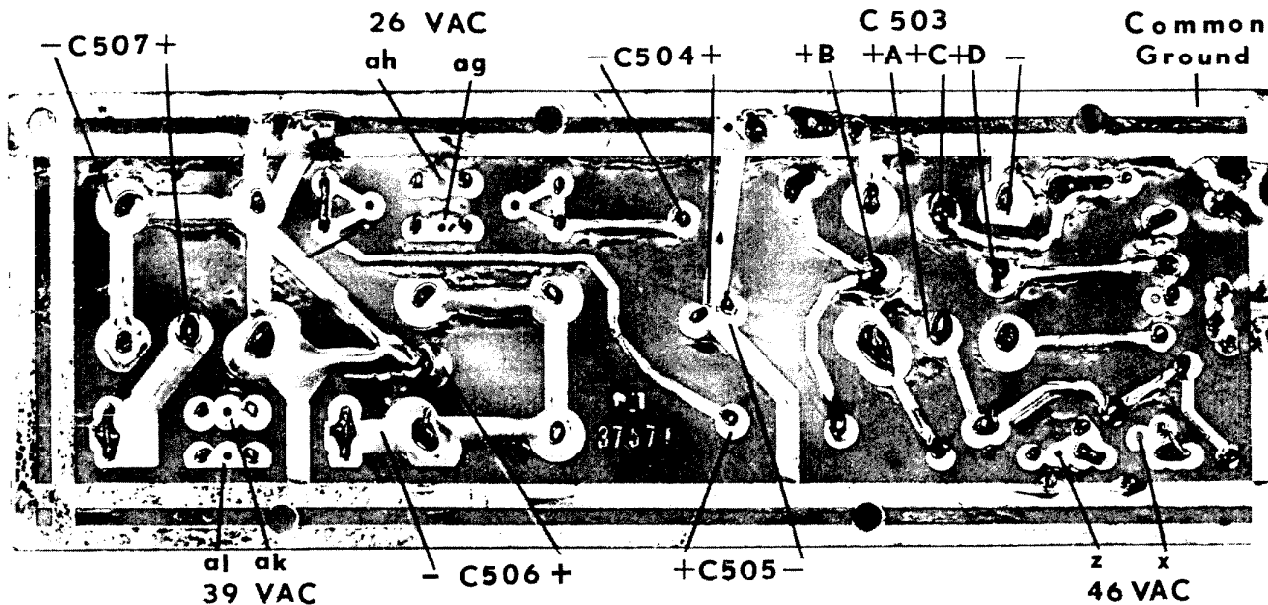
BOTTOM VIEW POWER SUPPLY PC ASSEMBLY
